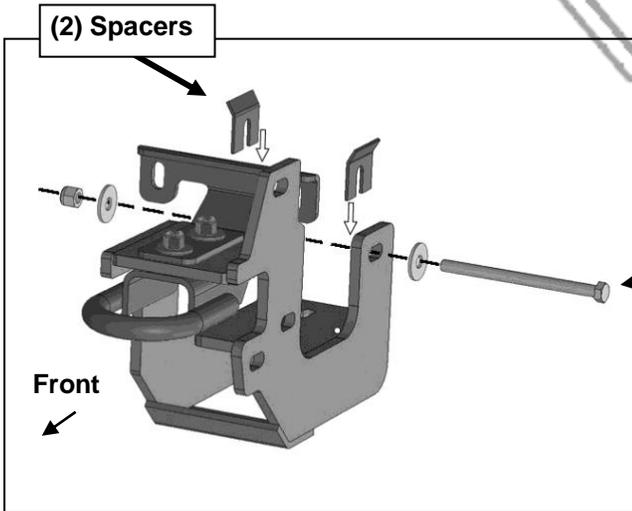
Reuse factory double bolt plate and hex nuts to attach Support Bracket to bumper bracket
